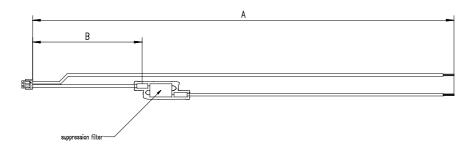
Power Supply Cable with Filtercoil ETV2
